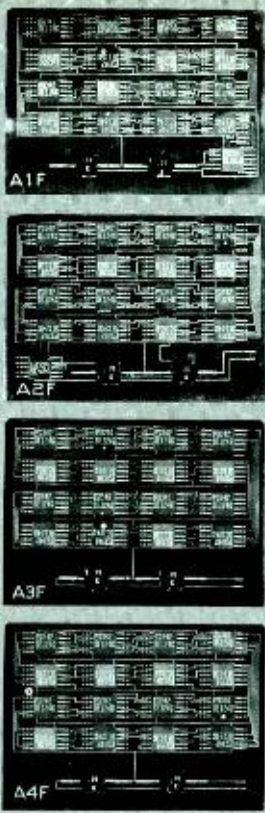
The four digital clock printed-circuit boards, with the flat packs packaged in a planar array.
